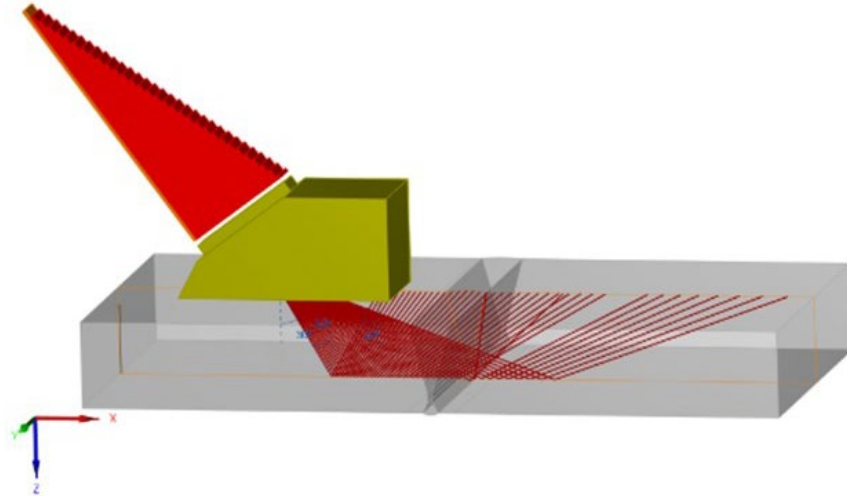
PAUT sectorial scan setup in a steel plate with weld
